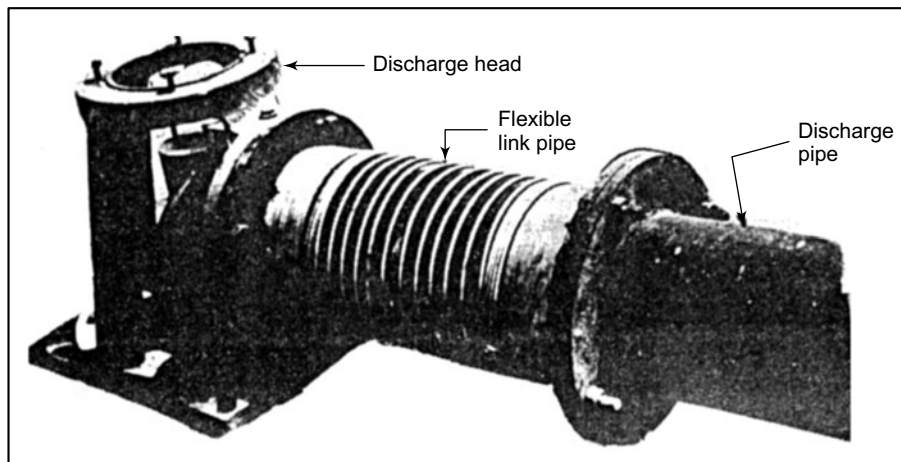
Discharge head assembly of a vertical turbine pump using flexible link pipe at the head end of discharge pipe
